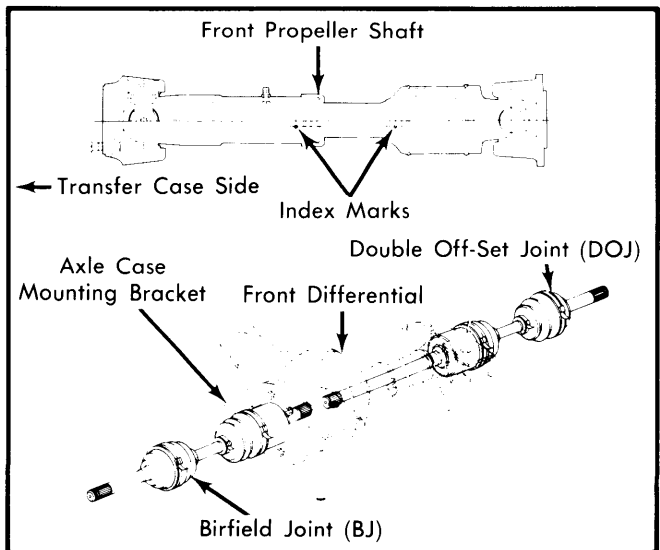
Exploded View of LUV 4-WD Front Axle Assembly
